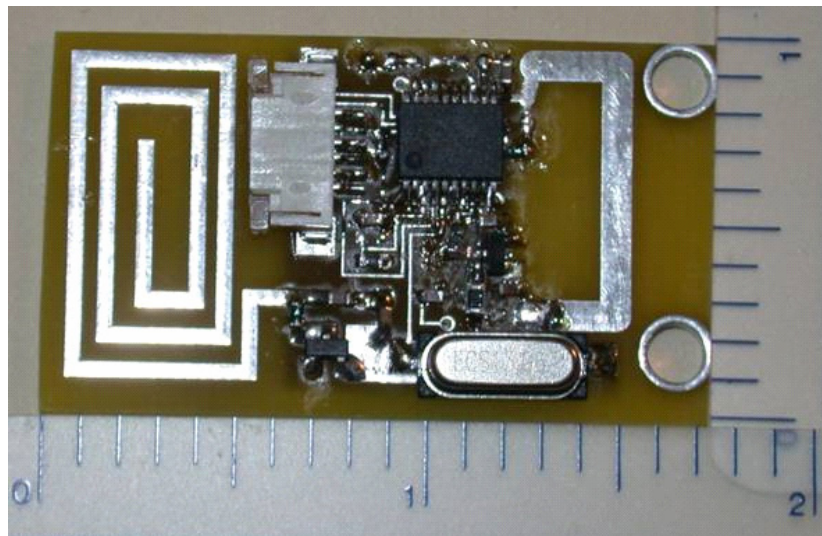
Fabricated Prototype One Board with Dimensions Indicated
